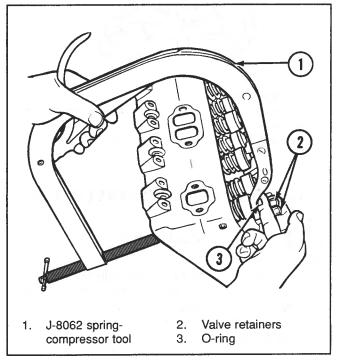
Compressing Valve Spring With Cylinder Head Removed
